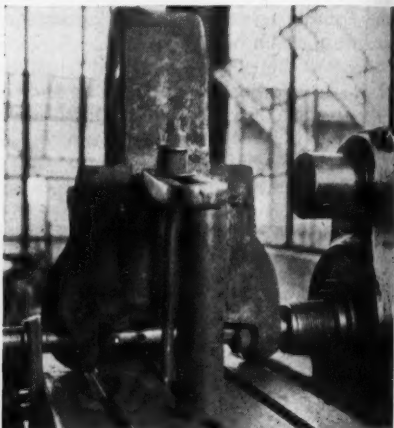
(Above)—Boring holes in front coupler for knuckle pin bushings.
